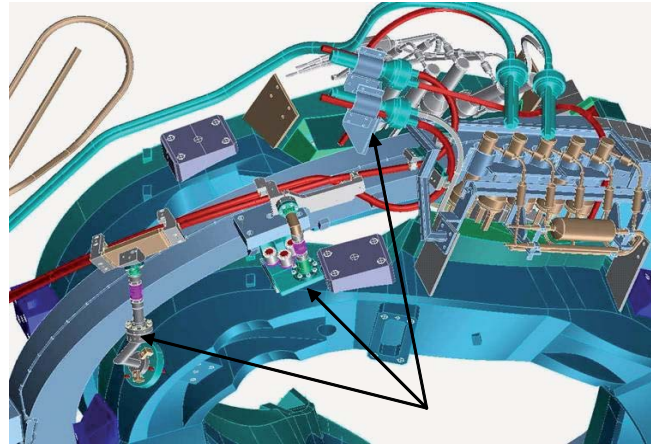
Mechanical supporting bearing for fixing the bus-bars on the magnet system
